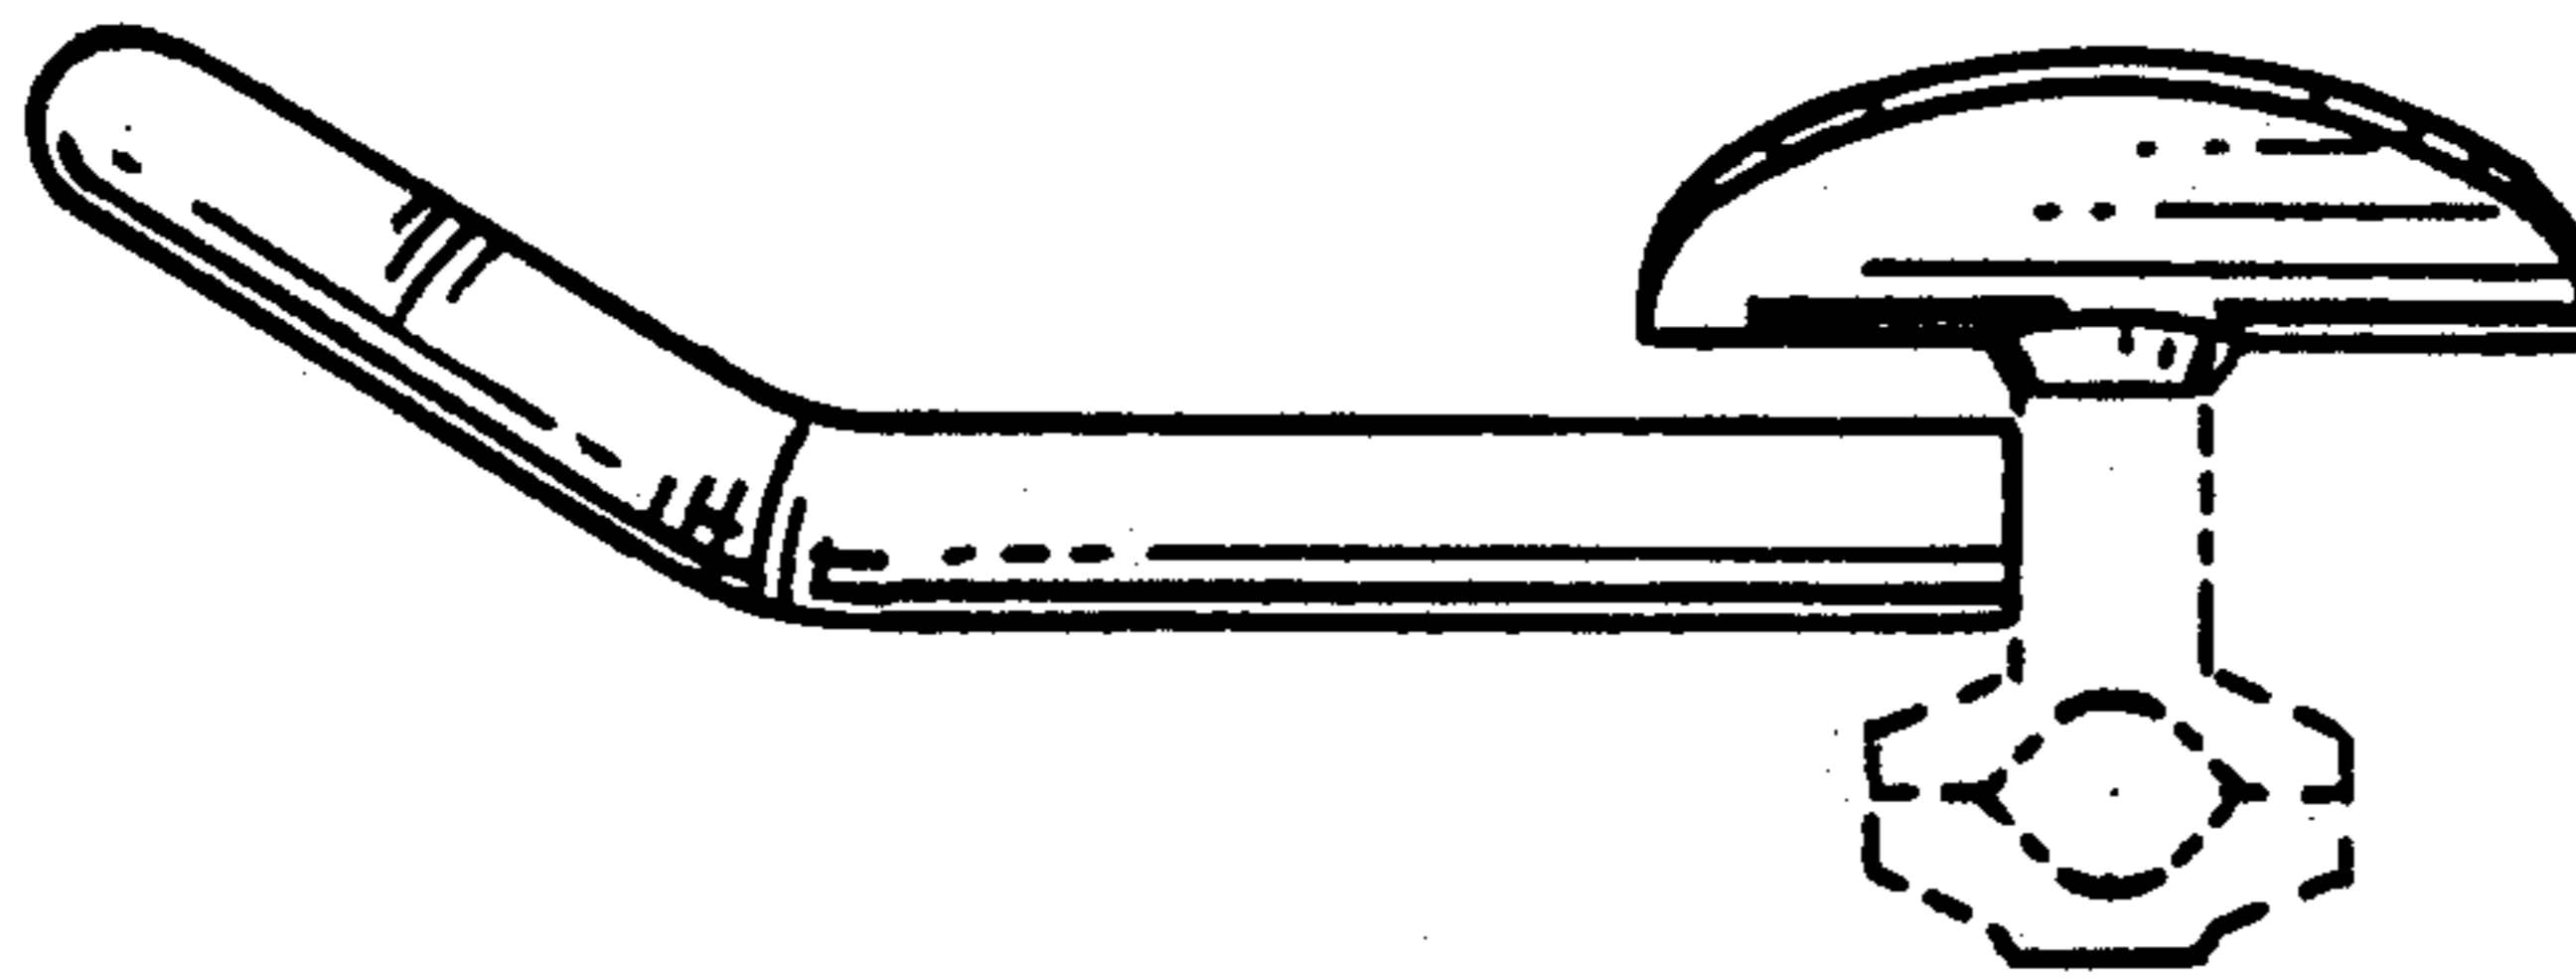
is a left side elevational view of a combined auxiliary bar and arm rests for attachment to a bicycle handlebar showing a fourth embodiment of my new design, the right side being a mirror image of that shown;
